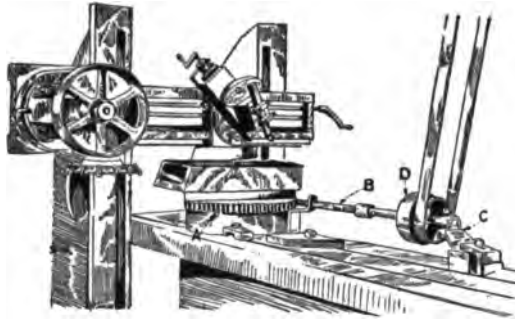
A TURNING AND BORING ATTACHMENT FOR THE PLANER
